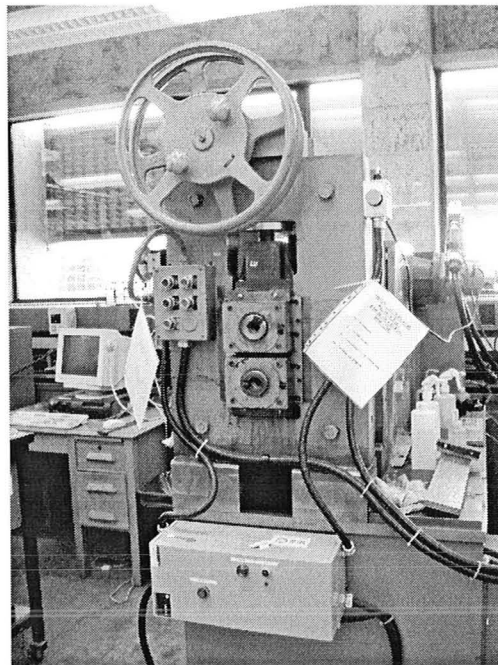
Conventional rolling mill for thermomechanical testing.
